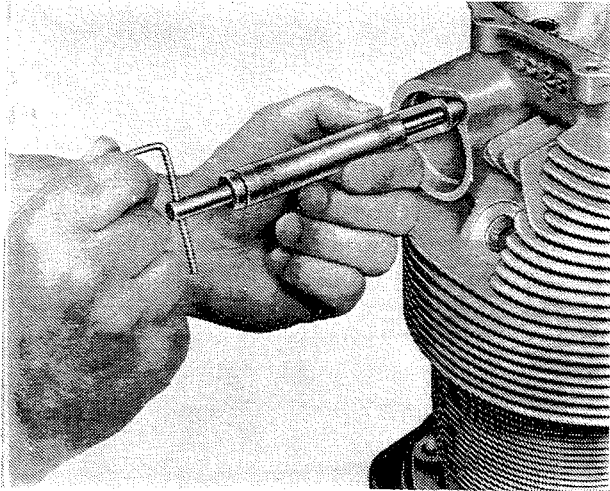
INSTALLING TYPICAL HELICAL COIL INSERT
